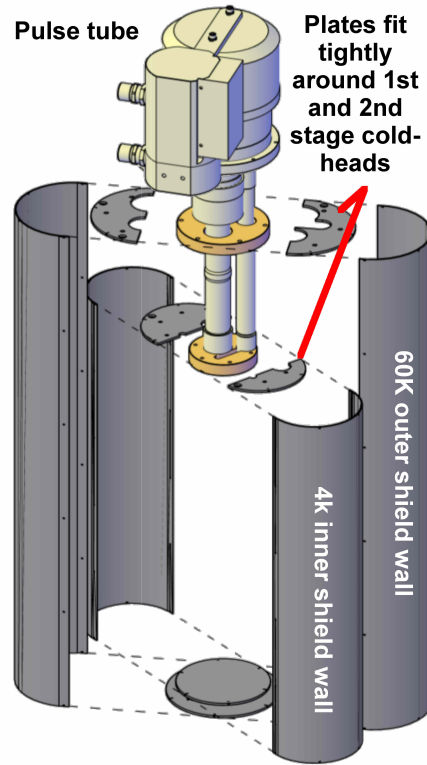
Exploded view of the basic radiation shield assembly, without any superinsulation. The larger of the shields encloses the 1<sup>st</sup> cooling stage and is held below 60K, with actual temperature dependent on heat load. It also encloses the entire 2<sup>nd</sup> stage, including its radiation shield and everything inside. The smaller shield is held below 4.2K and encloses the main parts of the experiment such as the helical resonator, low-temperature superconductor coils and the Geonium Chip itself, along with its cryogenic vacuum chamber. The top plates of the shields are split to allow a snug fit around the helium tubes which run up from the cold plates.
